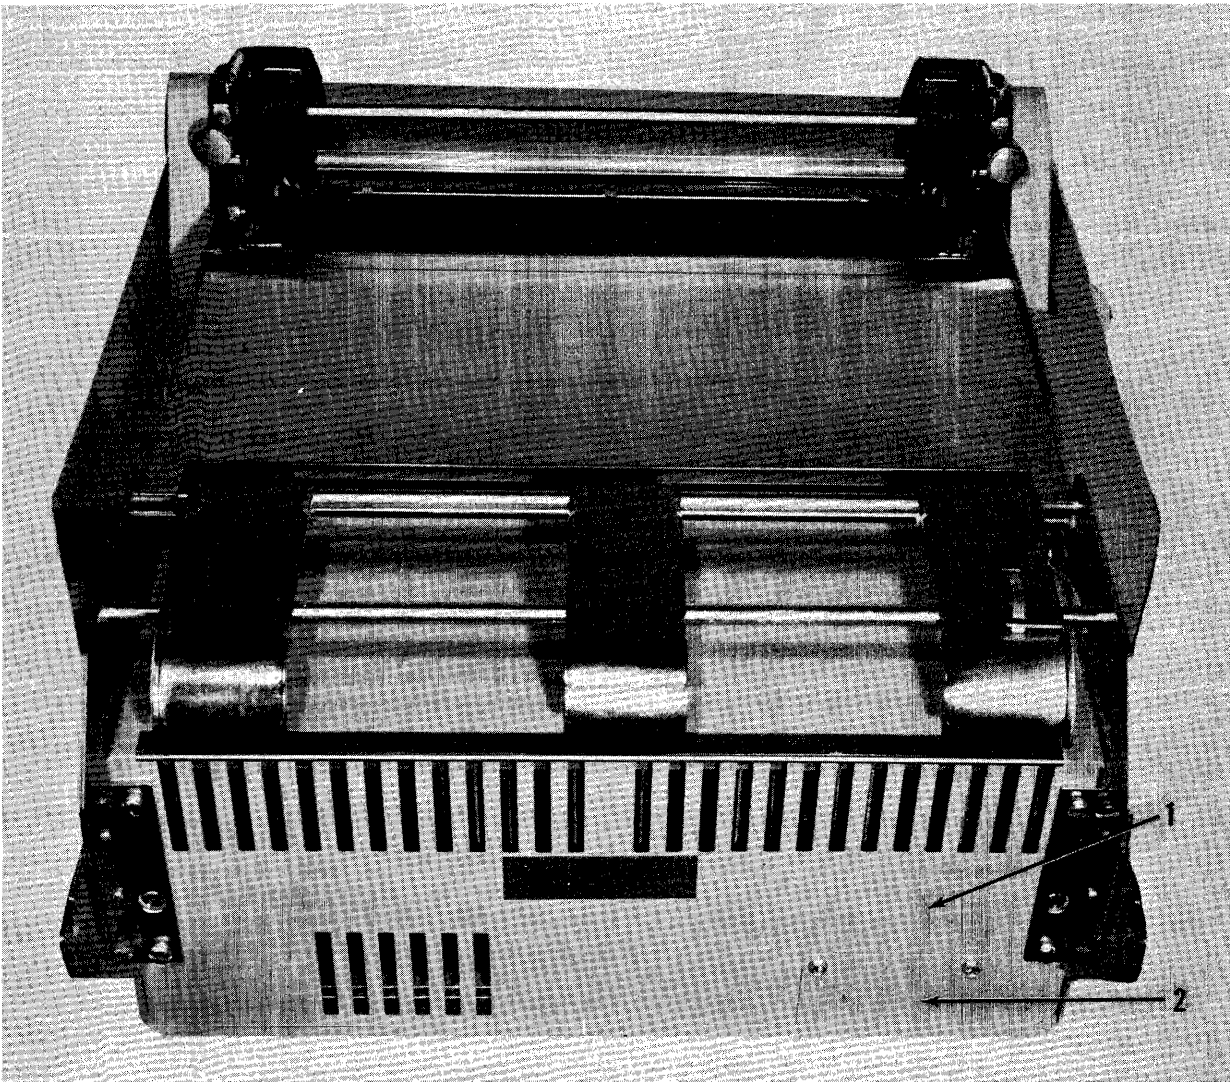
Bustle Assembly for TerminiNet 1200 A Printer
